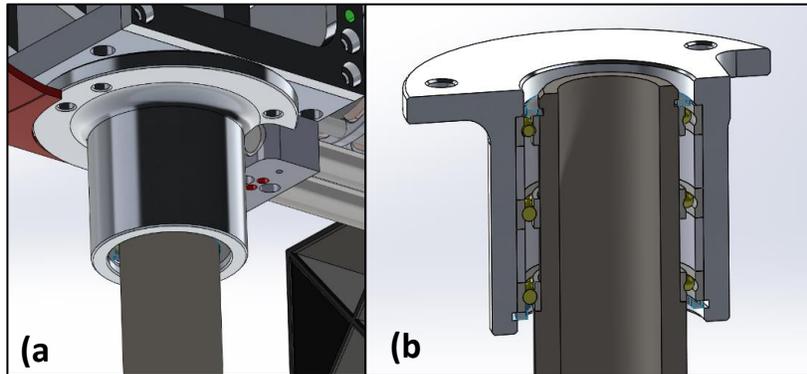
(a) Coupler in turbine assembly and (b) cross sectional view of the coupler
